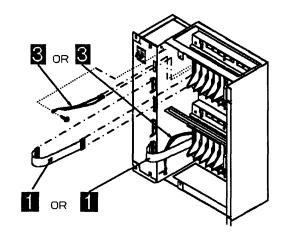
LIC Board Type 2 Enclosure Assembly
